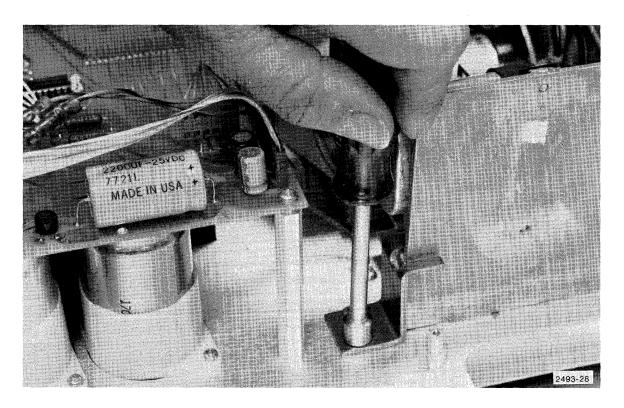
Loosening Drive Unit Fork/Clamp.
